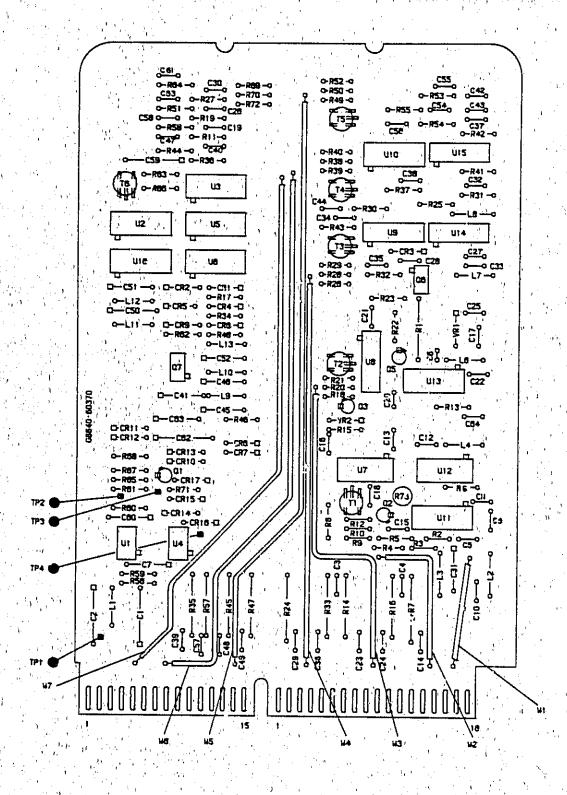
A10A2 RF Divider Assembly Component Locations (P/O CHANGE 30)
